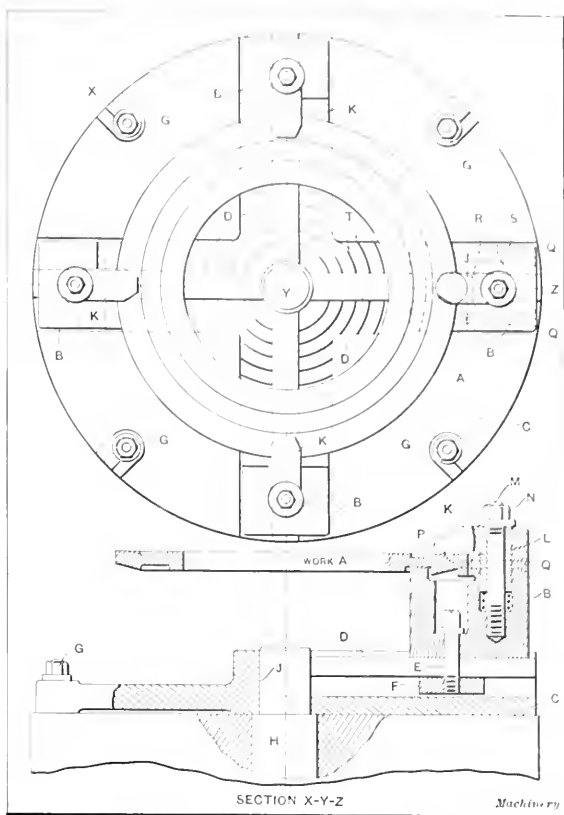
Special Fixture for holding a Number of Different Sizes of Bevel Gear Blanks on the Boring Mill
